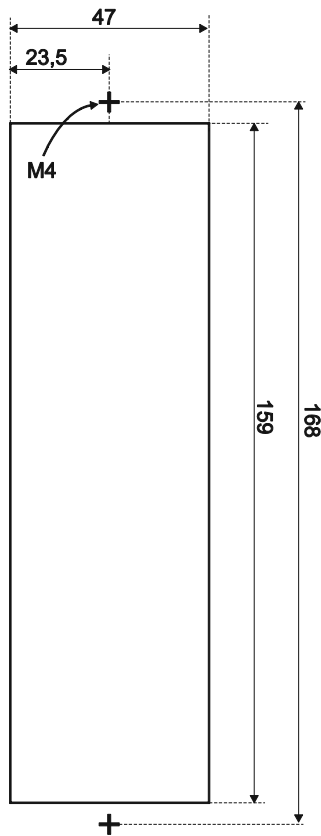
AQ101 cut out for panel mounting, scaling in millimeter.
